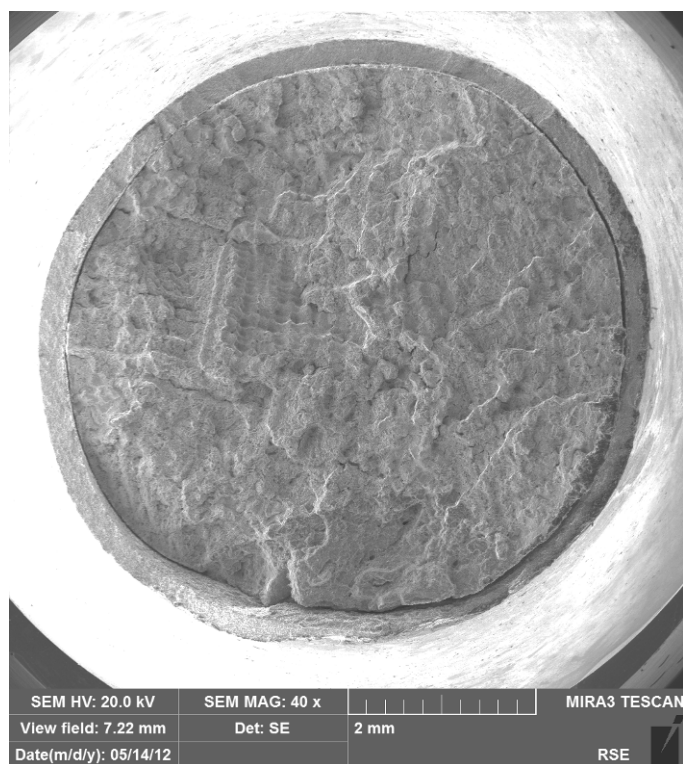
Fracture surface of broken specimen R262-6
